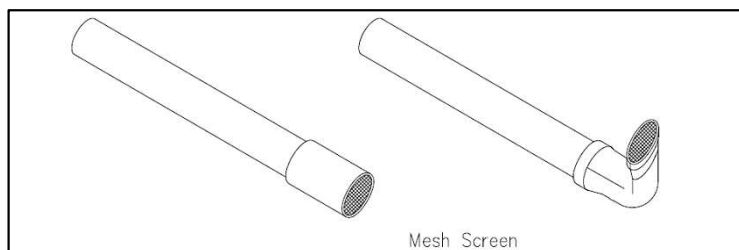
Screen Installation - NOTE: Vent termination elbow is meant to be installed open end facing the ground. Orientation in Figure 12 is meant to demonstrate proper Vent Screen installation ONLY.
